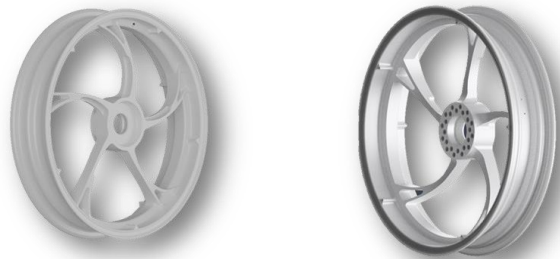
(a) Wheel CAD front, (b) Wheel CAD rear.
